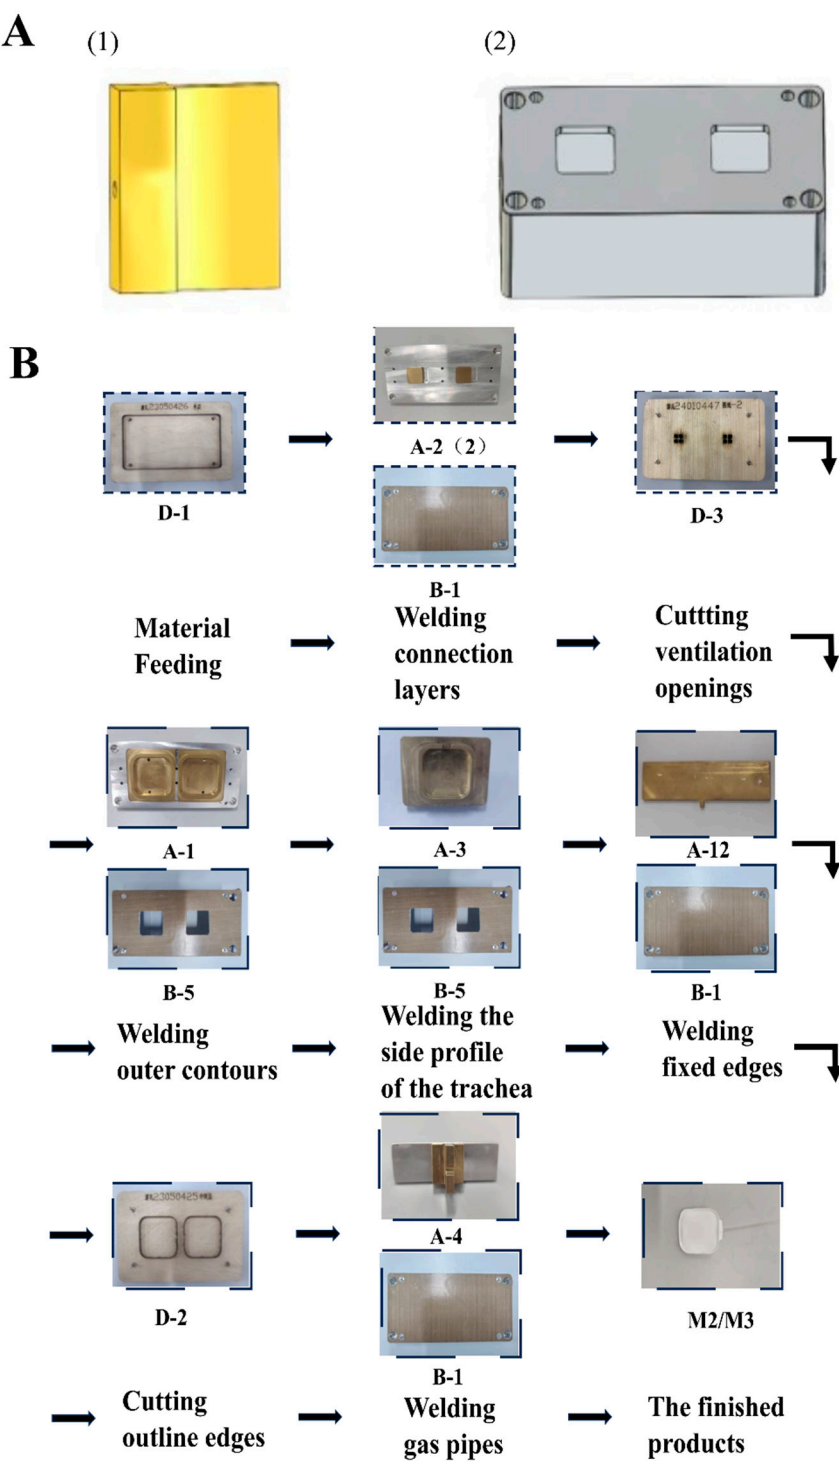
The Planning and Manufacturing Process of the Thin-Film Deflection Actuators. (A) The manufacturing molds for deflection modules: (1) The side-fixed welding mold. (2) The positioning hollow lower mold 2. (B) The manufacturing process of the thin-film deflection actuators.
